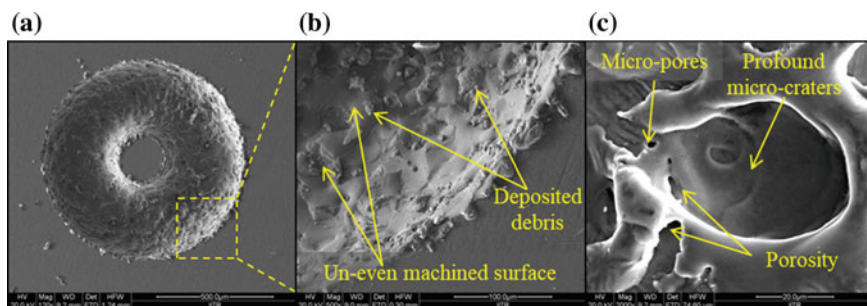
Morphology of machined surface at higher voltage using EDM oil as dielectric medium
